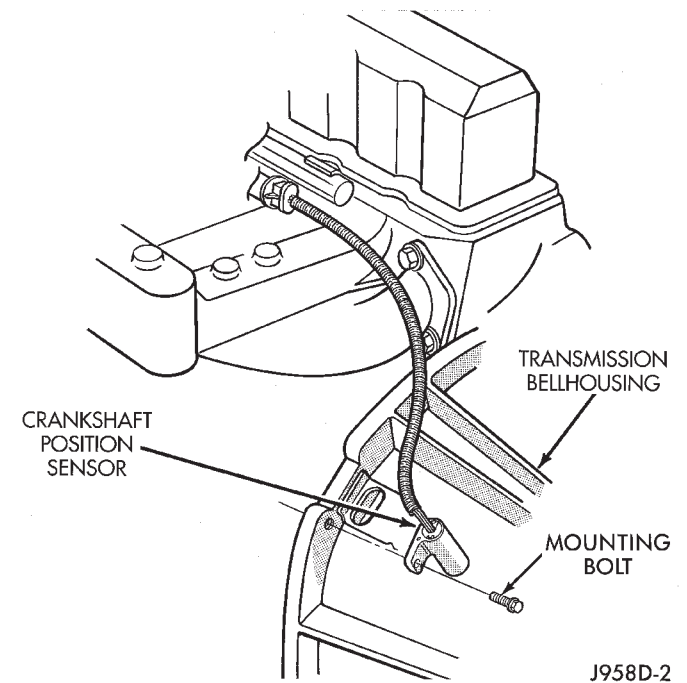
Crankshaft Position Sensor—4.0L Engine With Auto. Trans.
